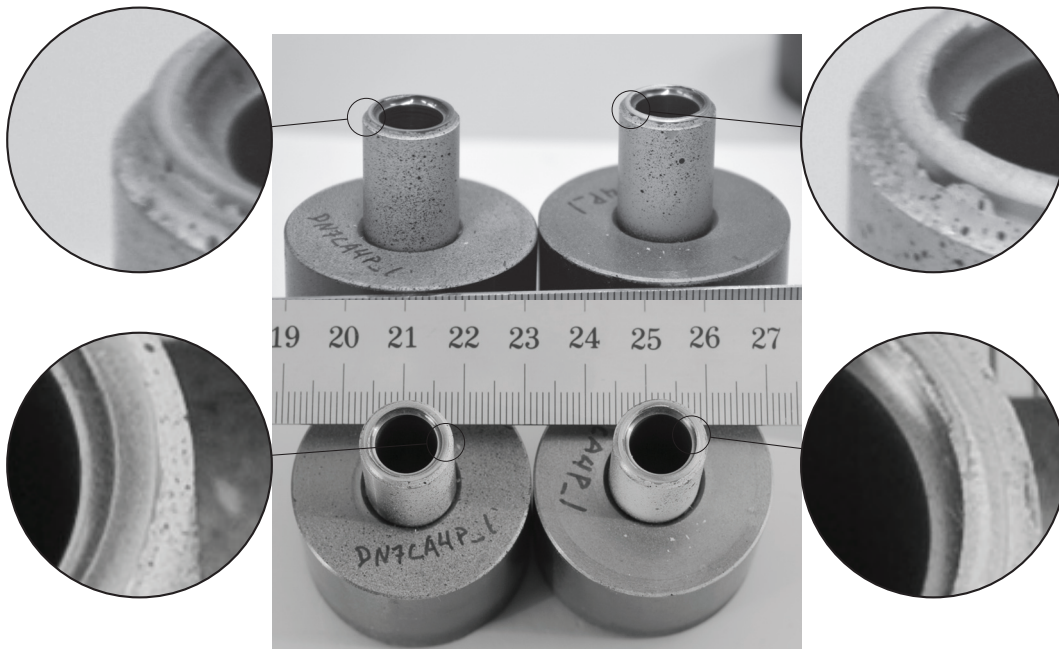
Fracture surface in cyclic for load path 4 in double notched specimens
